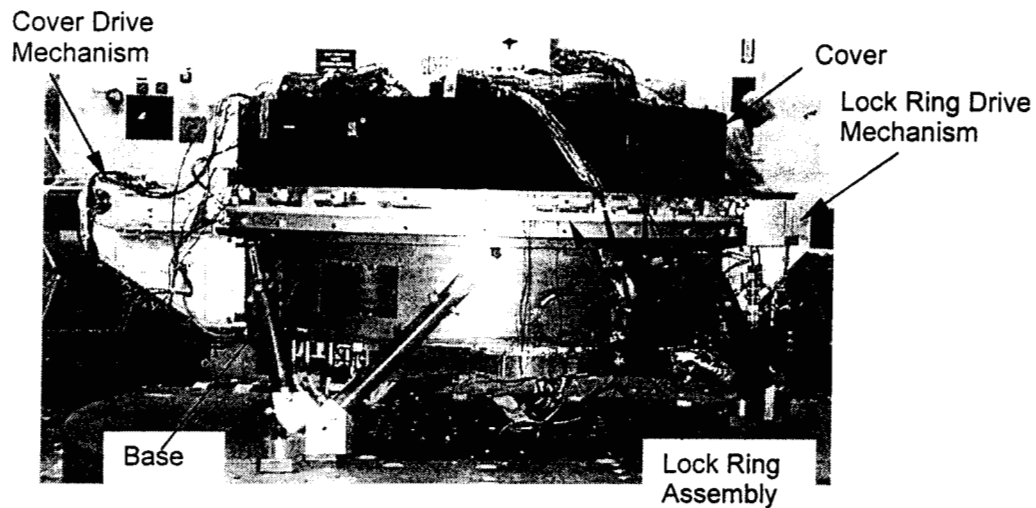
The Engineering Model integrated canister in the closed configuration is mounted on its vibration test fixture.
